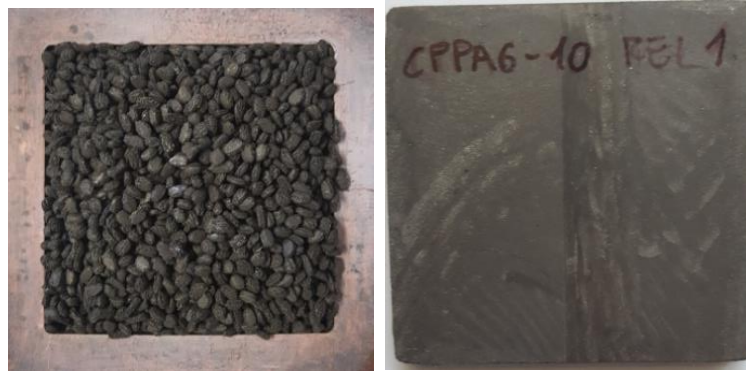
Molding of sample: mold with pellet and final plaquette shape of PA6 NdFeB (self-prepared 10%)
